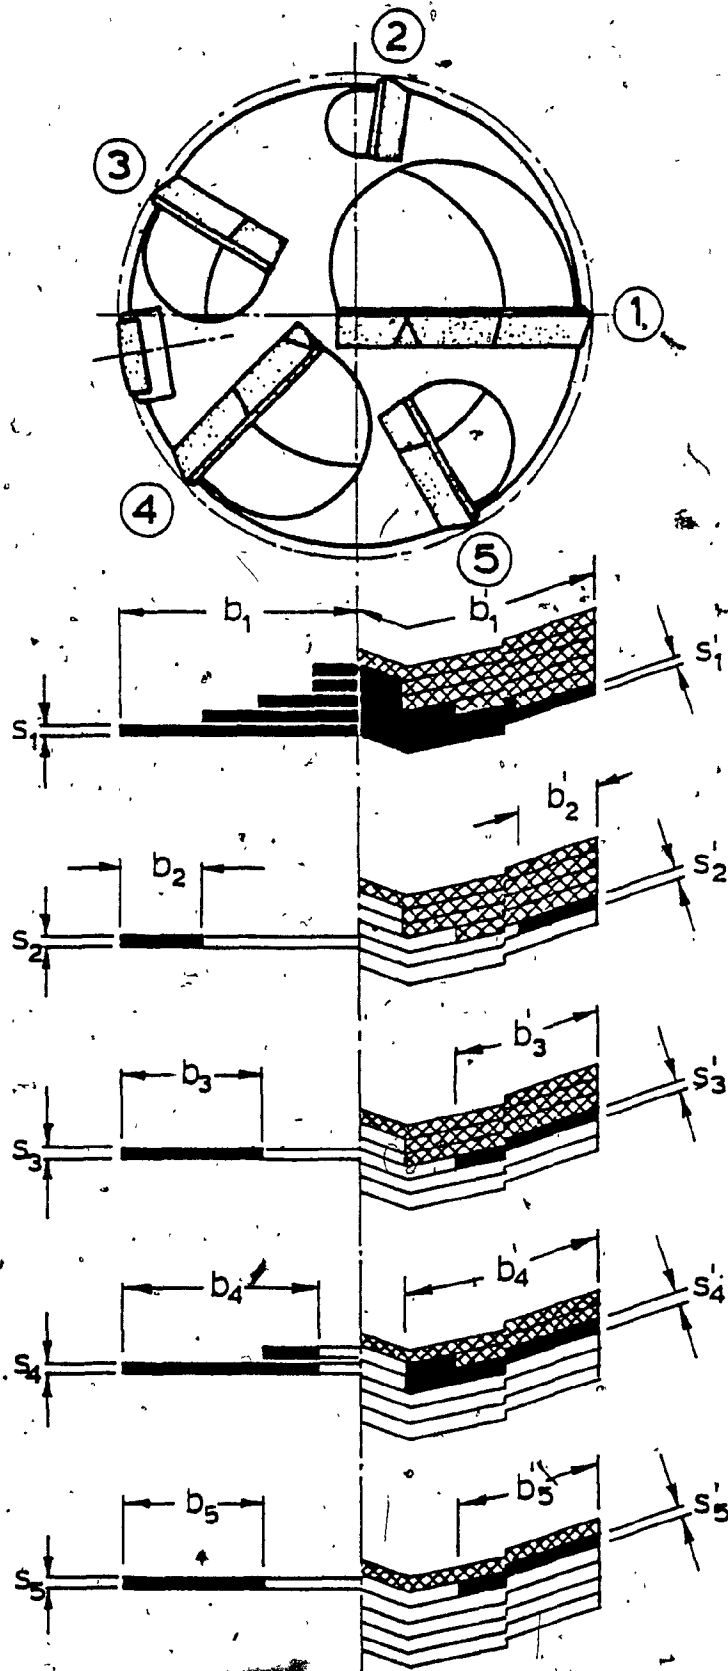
ARBITRARY TOOL DESIGN WITH EDGE PENETRATIONS.
